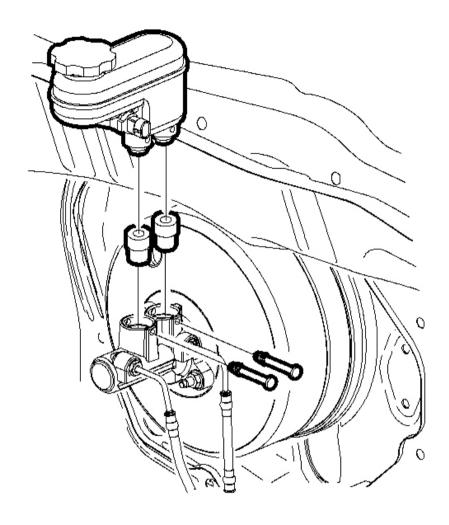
Removing/Installing Master Cylinder Reservoir Courtesy of GENERAL MOTORS CORP.
